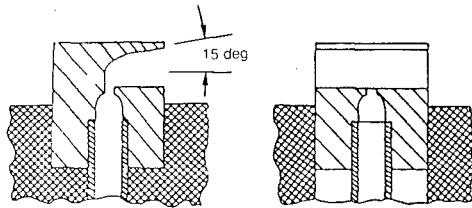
Cross-sectional sketches of flat spray fuel injection nozzles
